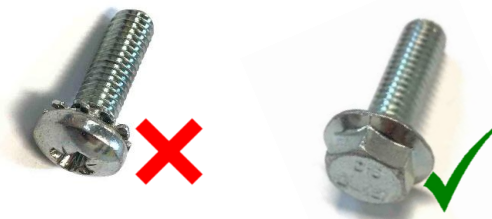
and 24b: Lid mounting bolts when worktop is removed
